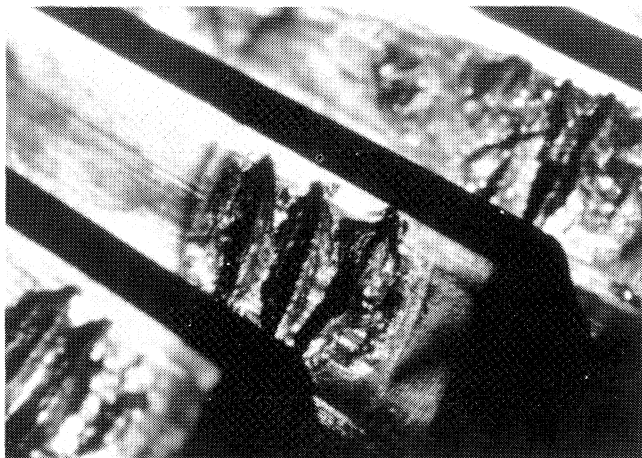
Gear Tooth Failure (warm tracking-cold flow).
